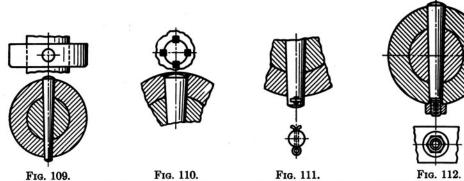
The conventional way of applying a taper pin, which depends upon friction to hold the pin in place. In gear boxes and other sealed mechanisms where it would be injurious for a pin to work loose, positive locking means must be provided.
